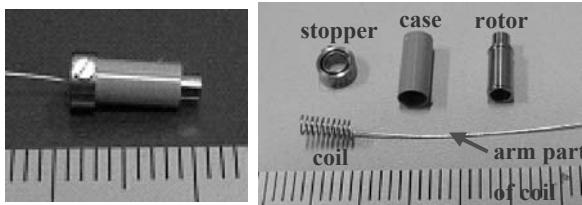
Prototype of ultrasonic micromotor (left:overall view, right:exploded view)
